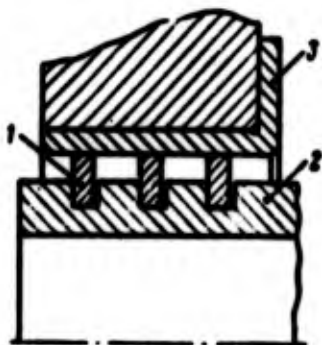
Sealing with elastic rings: 1 - elastic ring; 2 - bushing-ringholder; 3 - fixed bushing.
